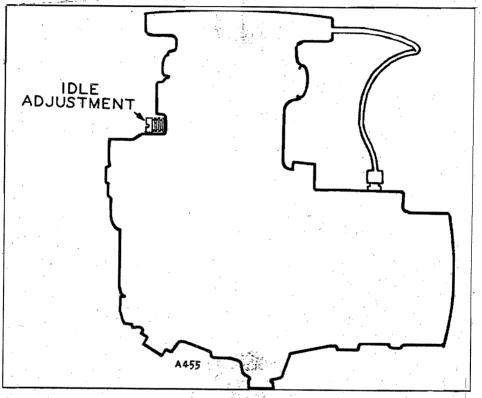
GASOLINE CARBURETOR ADJUSTMENT
